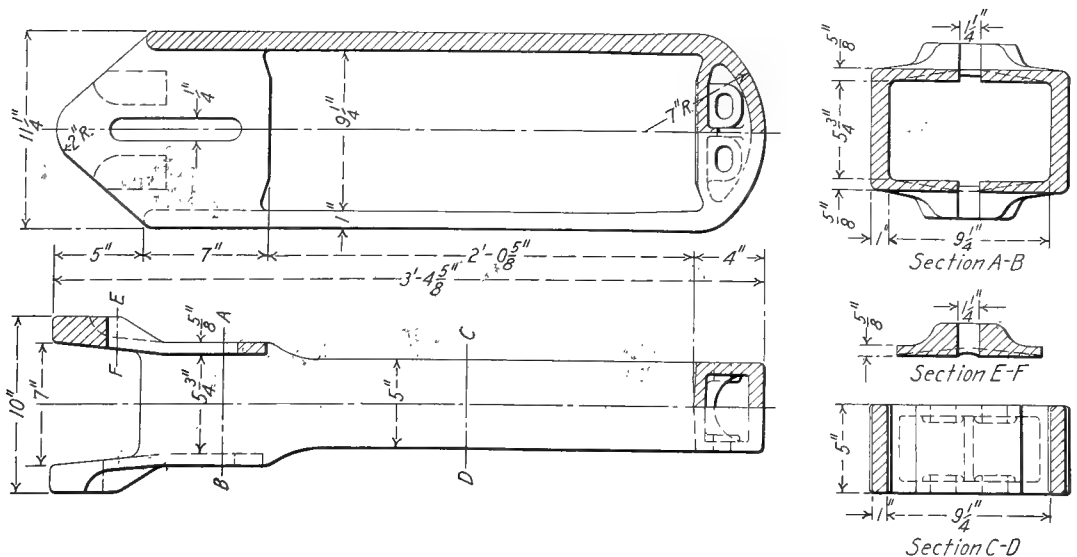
Buckeye Yoke for Friction Gear. Buckeye Steel Castings Company.
